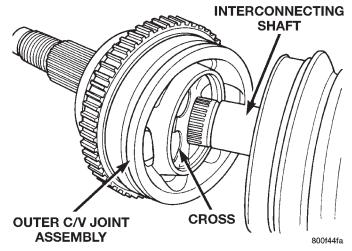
Outer C/V Joint Correctly Installed on Interconnecting Shaft
